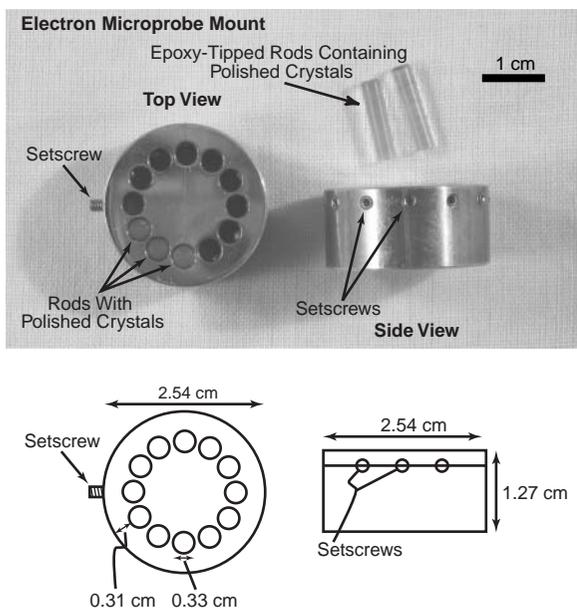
Photograph (top) and line drawing (bottom) of the electron microprobe mount and epoxy tipped rods containing polished crystals.
